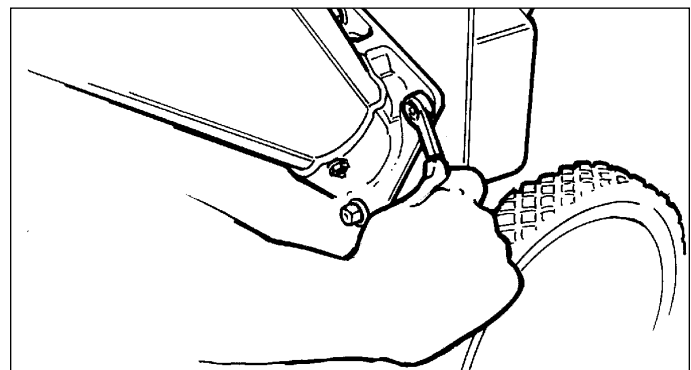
Removing the Chipper Cone to Inspect the Chipper Blades
